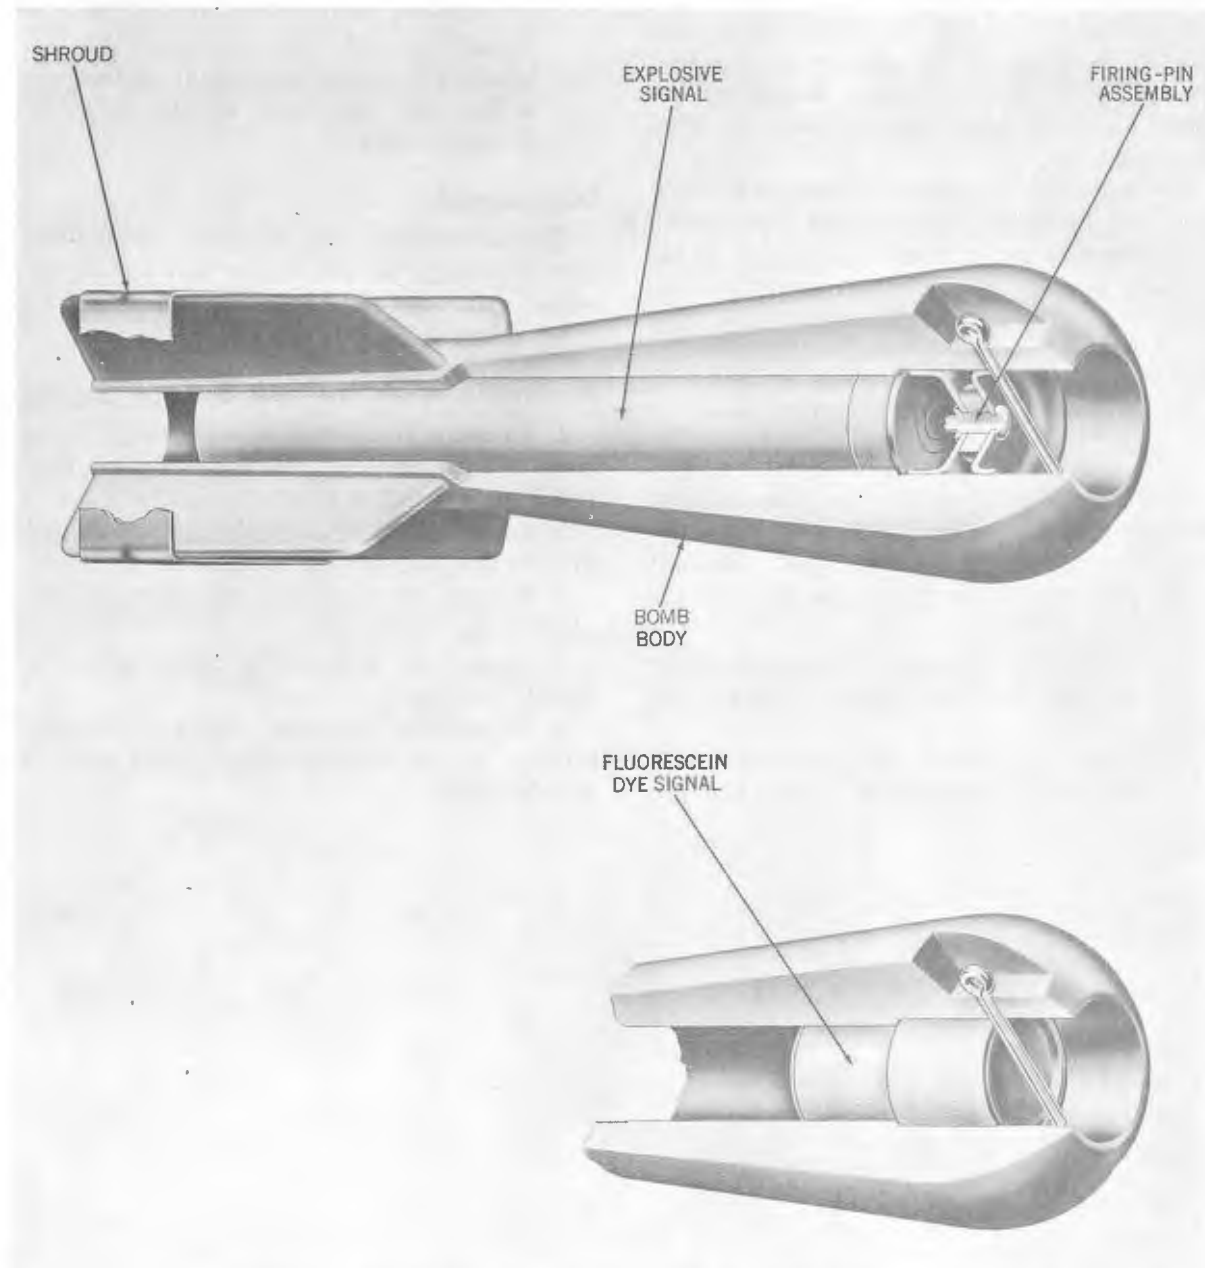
3-lb Miniature Practice Bomb AN-Mk 23 Mod 1, Cutaway View and Detail Showing Signal Mk 5 Mod 0 Installed.
